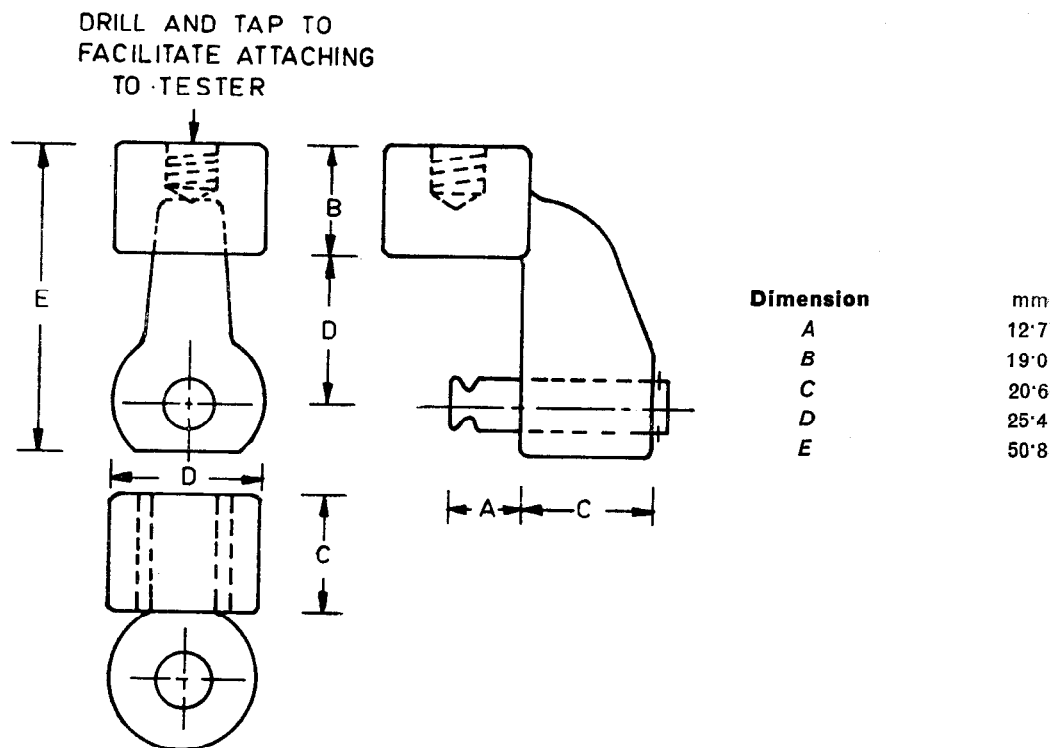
B TEST PIECE GRIPS FOR U-TEST
